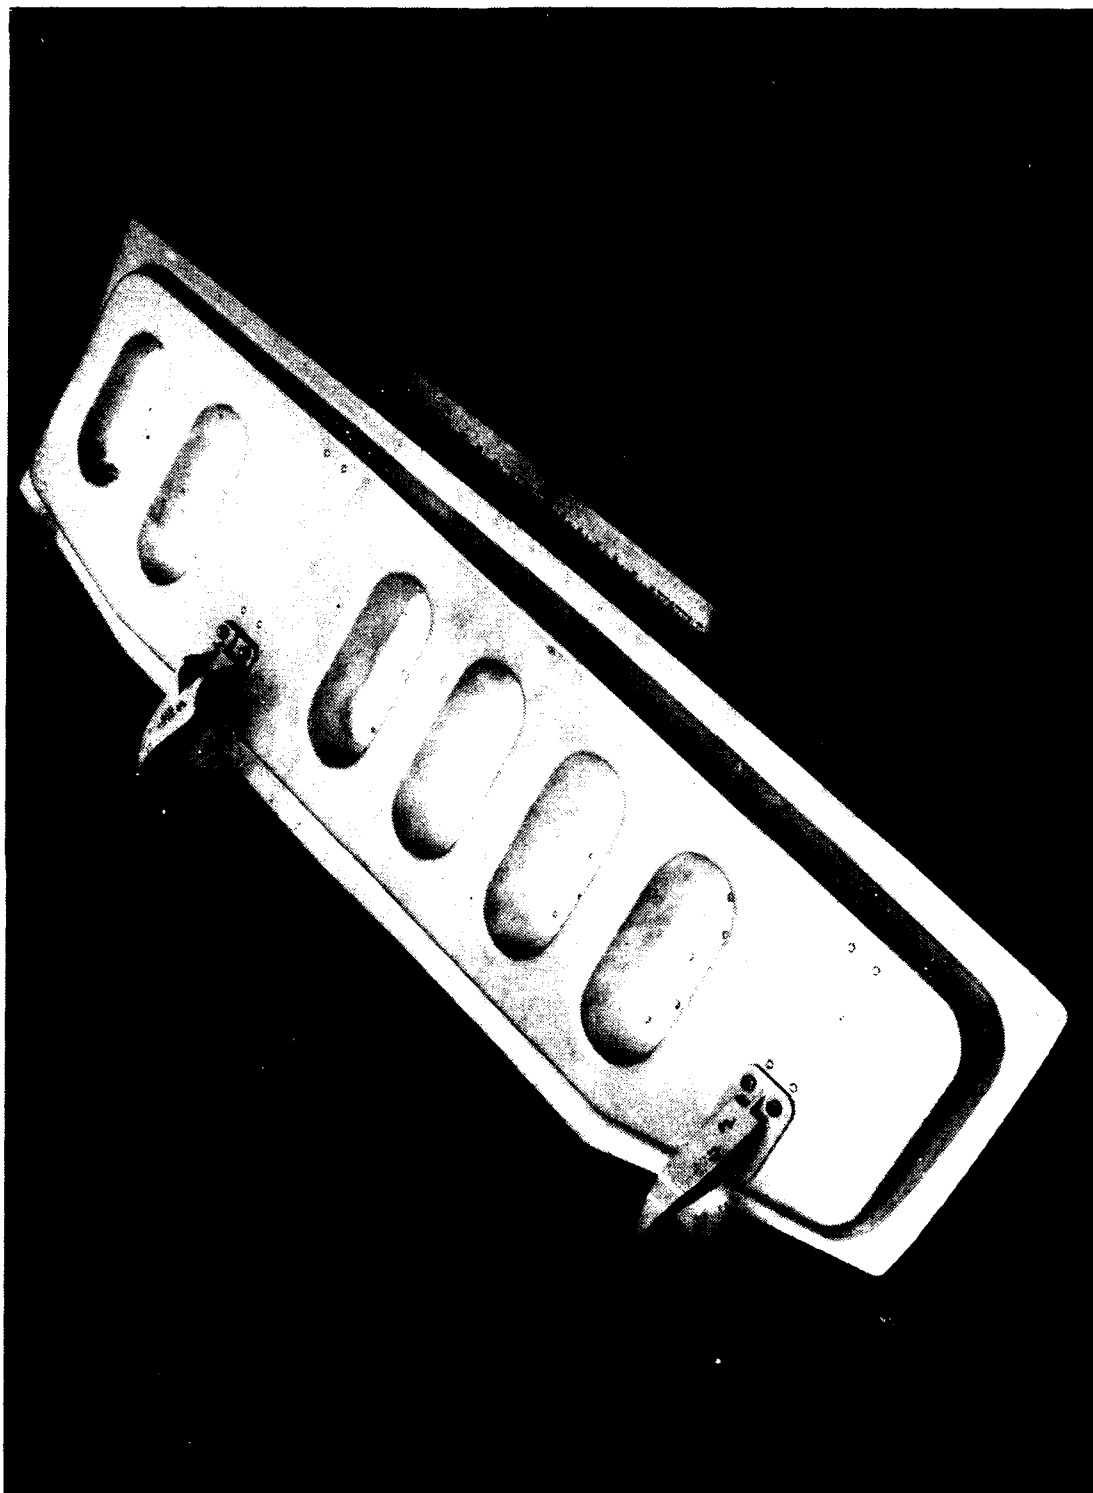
SPF Nose Landing Gear Door Assembled by Weldbonding
